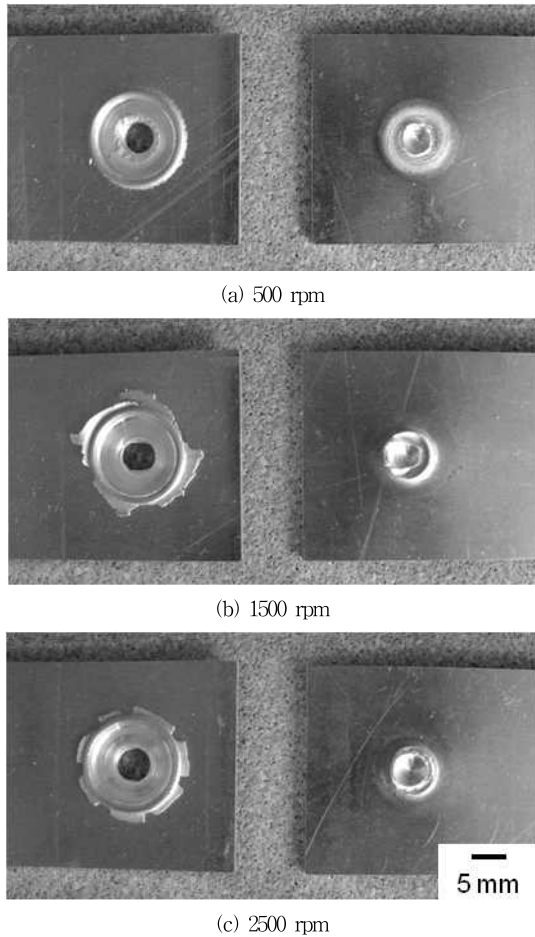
Appearances of the FSSWed AA5454-O aluminum alloy sheets after tensile shear test
